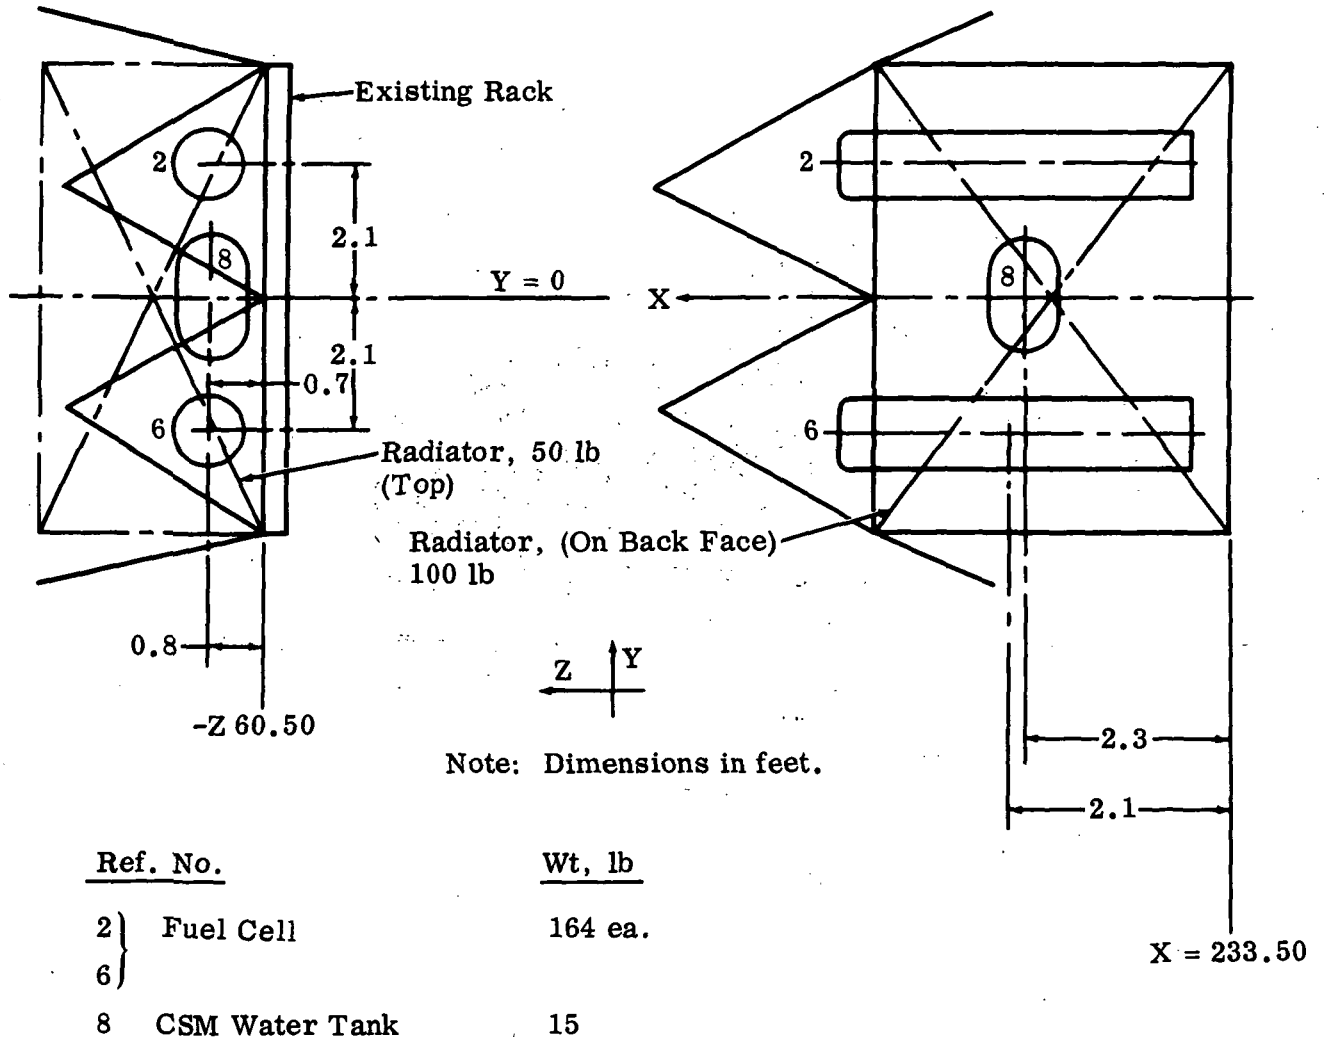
AC Fuel Cell Installation - Aft Equip. Bay
